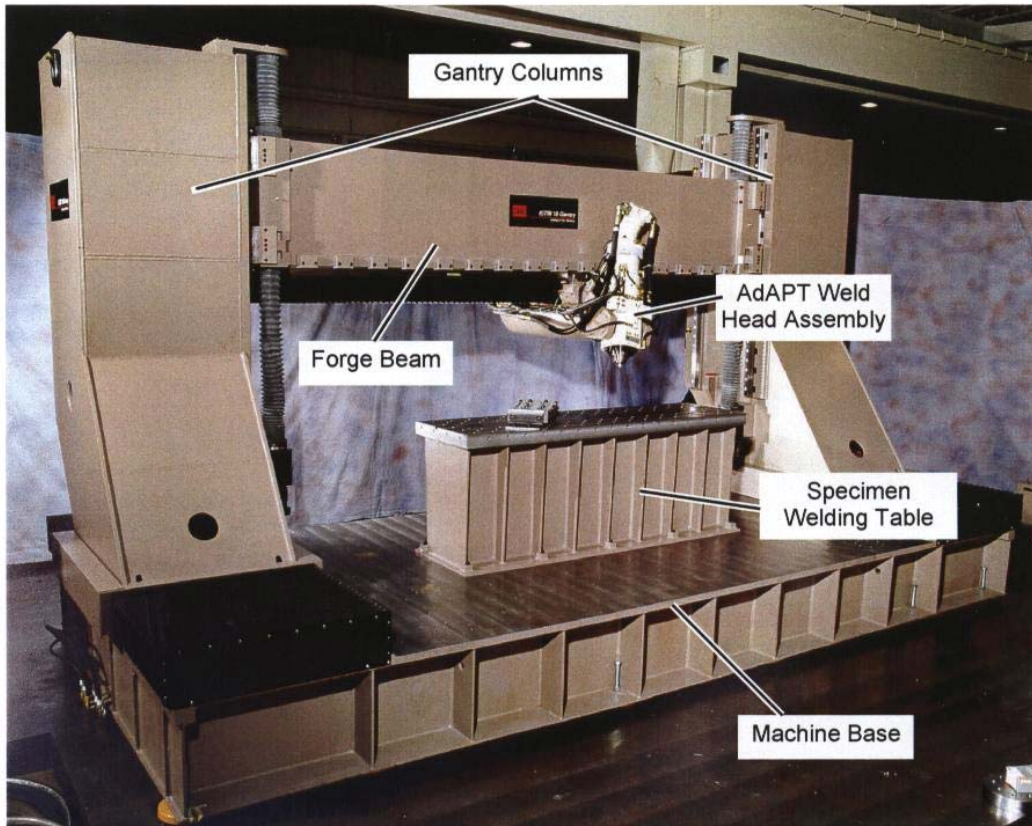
SDSM&T Friction Stir Welding Tool
